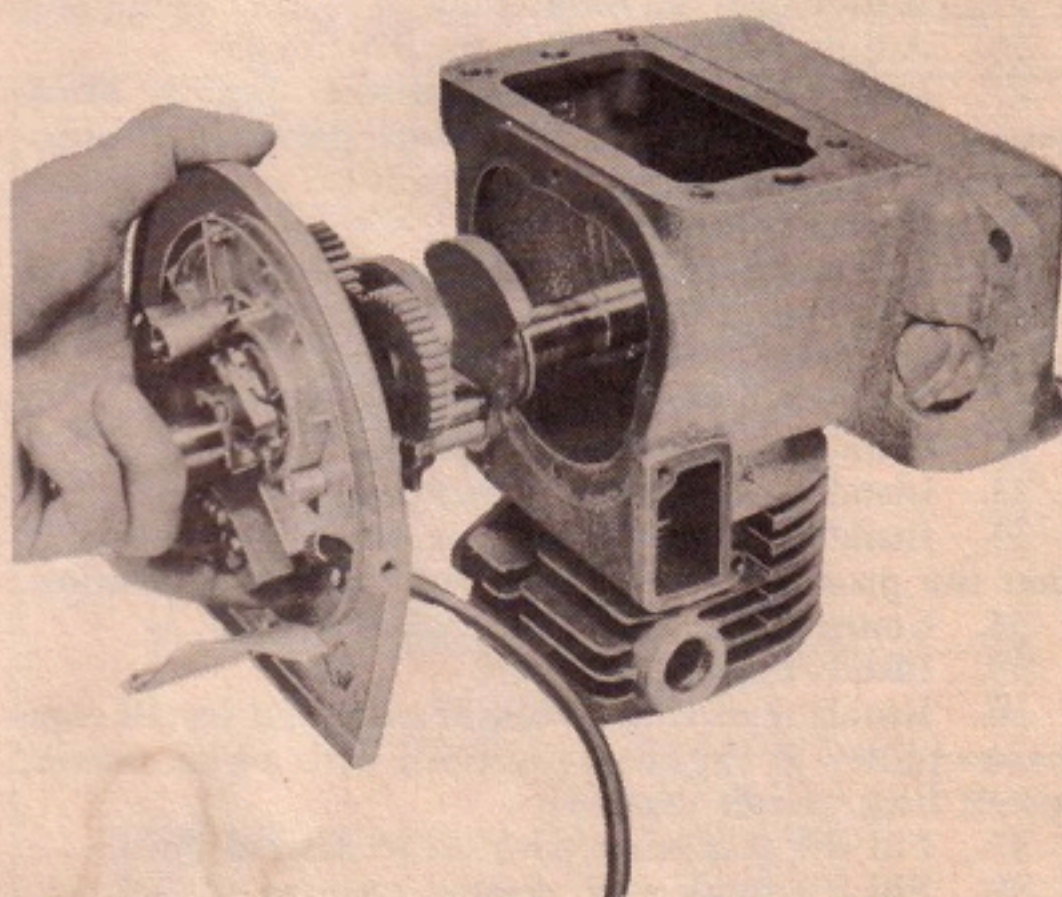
Crankshaft and Magneto Assembly—With cylinder block in inverted position, assemble crankshaft and magneto assembly into position
